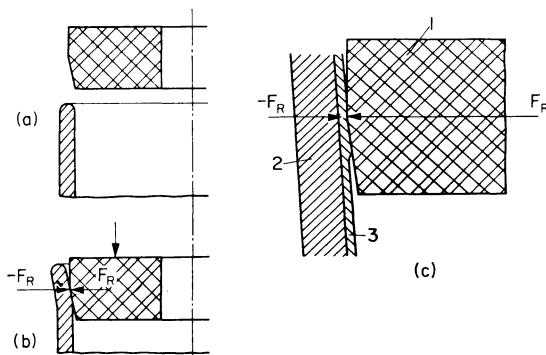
Completing a compression (ram) seal; (a) parts before sealing; (b) the completed seal; (c) detail of the seal: (1) ceramic; (2) metal tube; (3) ductile plating. After Zollman¹³⁵⁷ (*Courtesy of Pergamon Press*)
